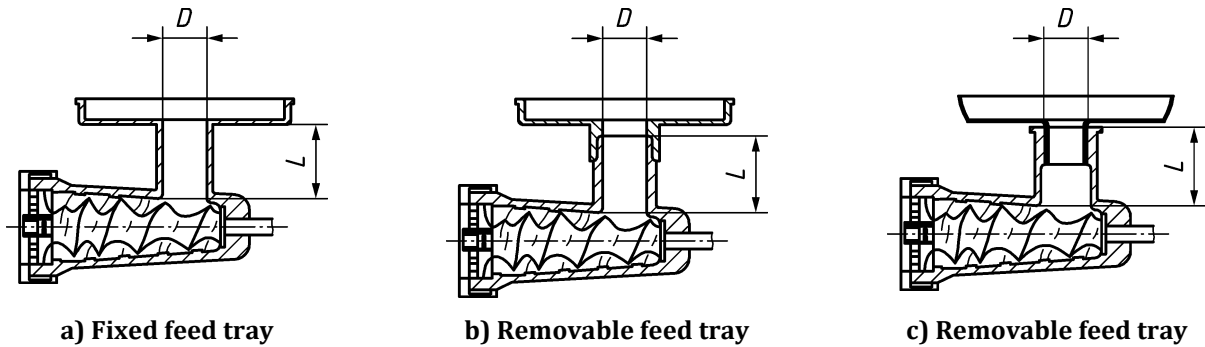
Feed intake without restrictor plate — Safety dimensions
